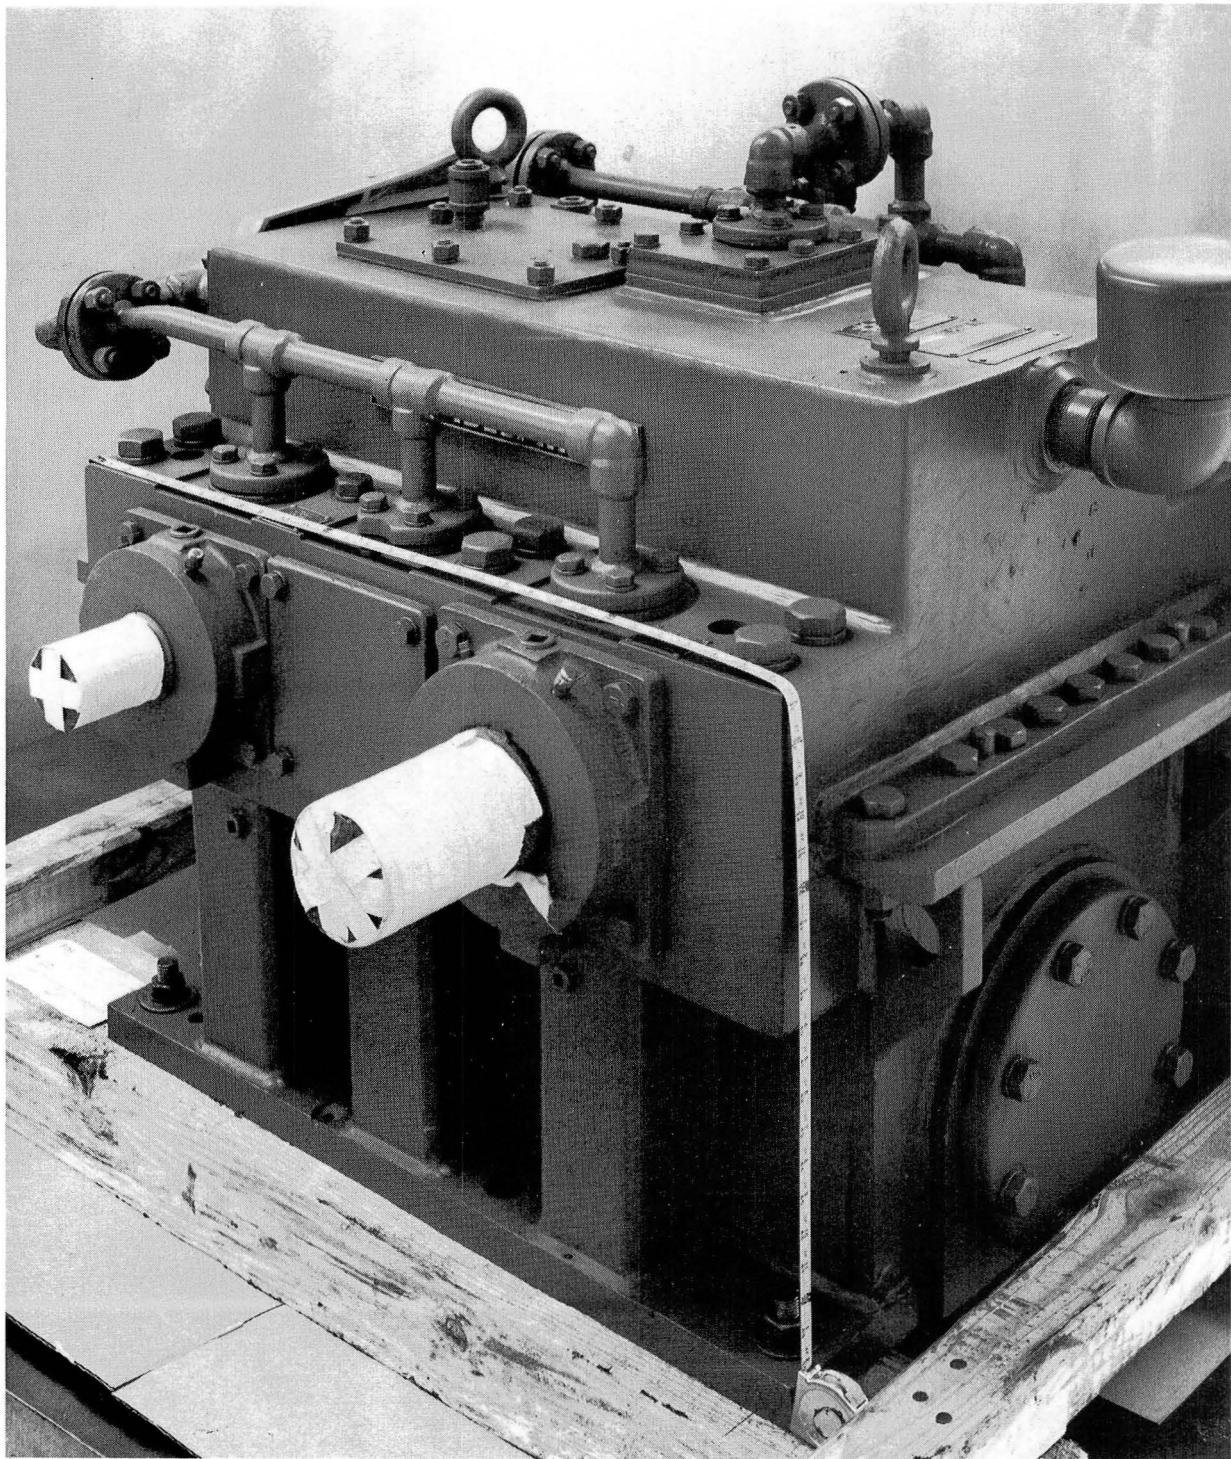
Drive Gearbox for Supercritical Shaft Test Rig
